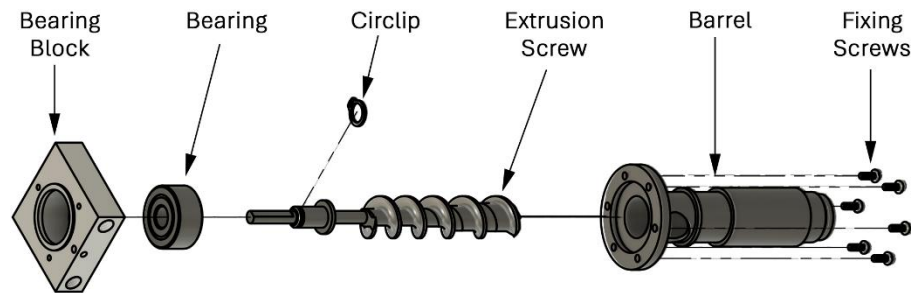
Fixturing of bearing block to barrel and screw fixturing to bearing.
